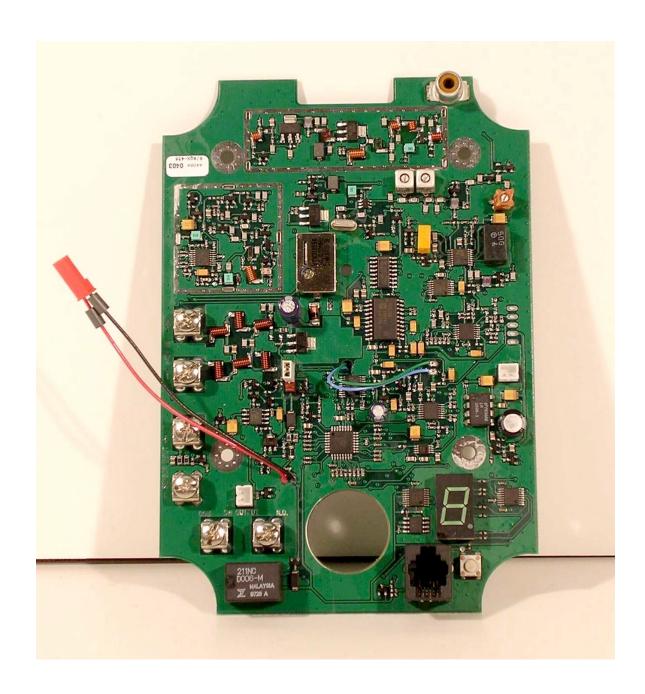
complete topside PCB assembly with shields removed
